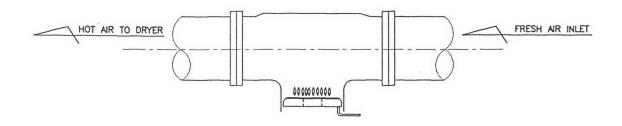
Show Chamber and LPG Burner of hot air unit.
